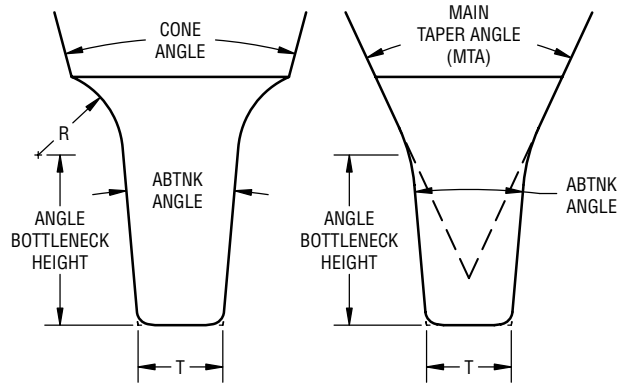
Angle bottleneck (ABTNK or AB) geometry dimensions
